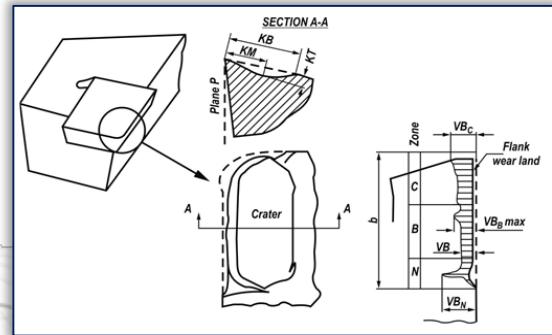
Types of wear on turning tools according to ANSI/ASME Tool Life Testing [6]
